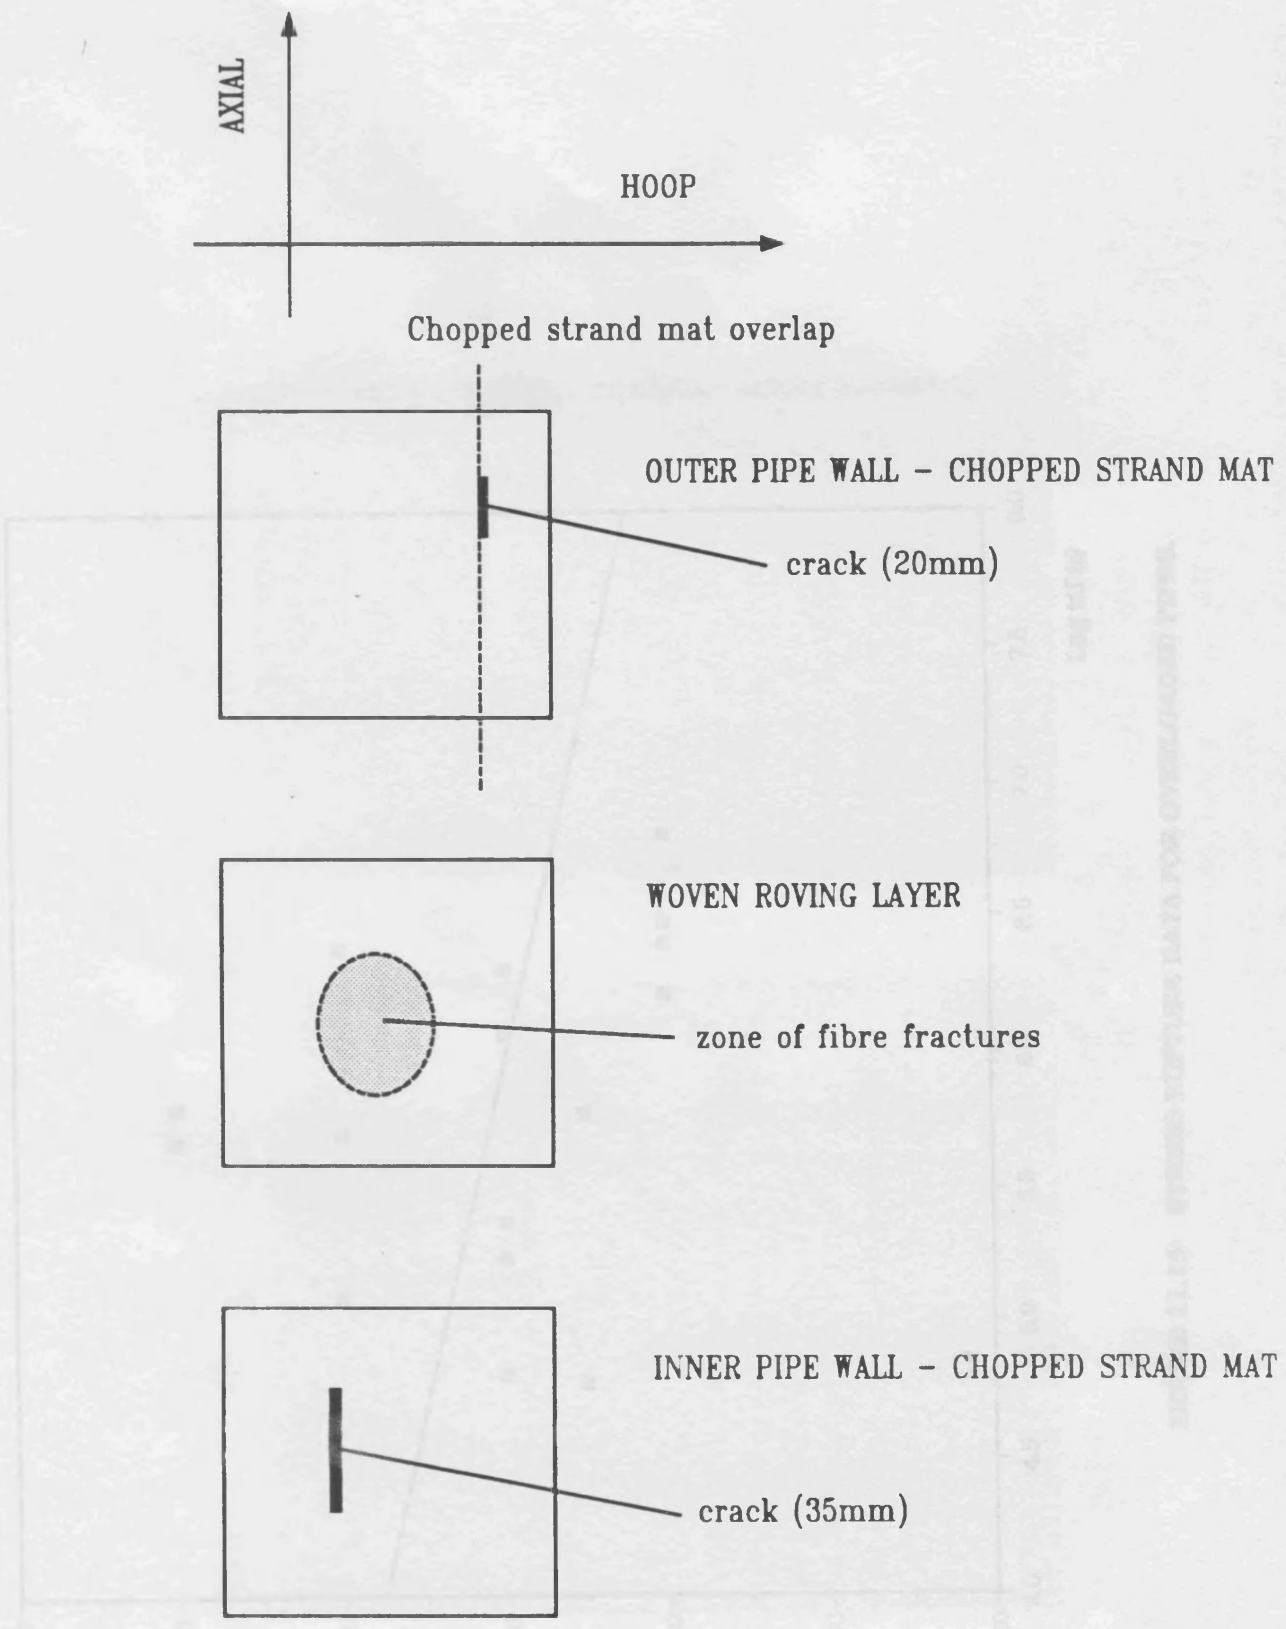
SCHEMATIC OF REINFORCEMENT DAMAGE AT POINT OF LEAKAGE IN VIRGIN PIPE WALL.
